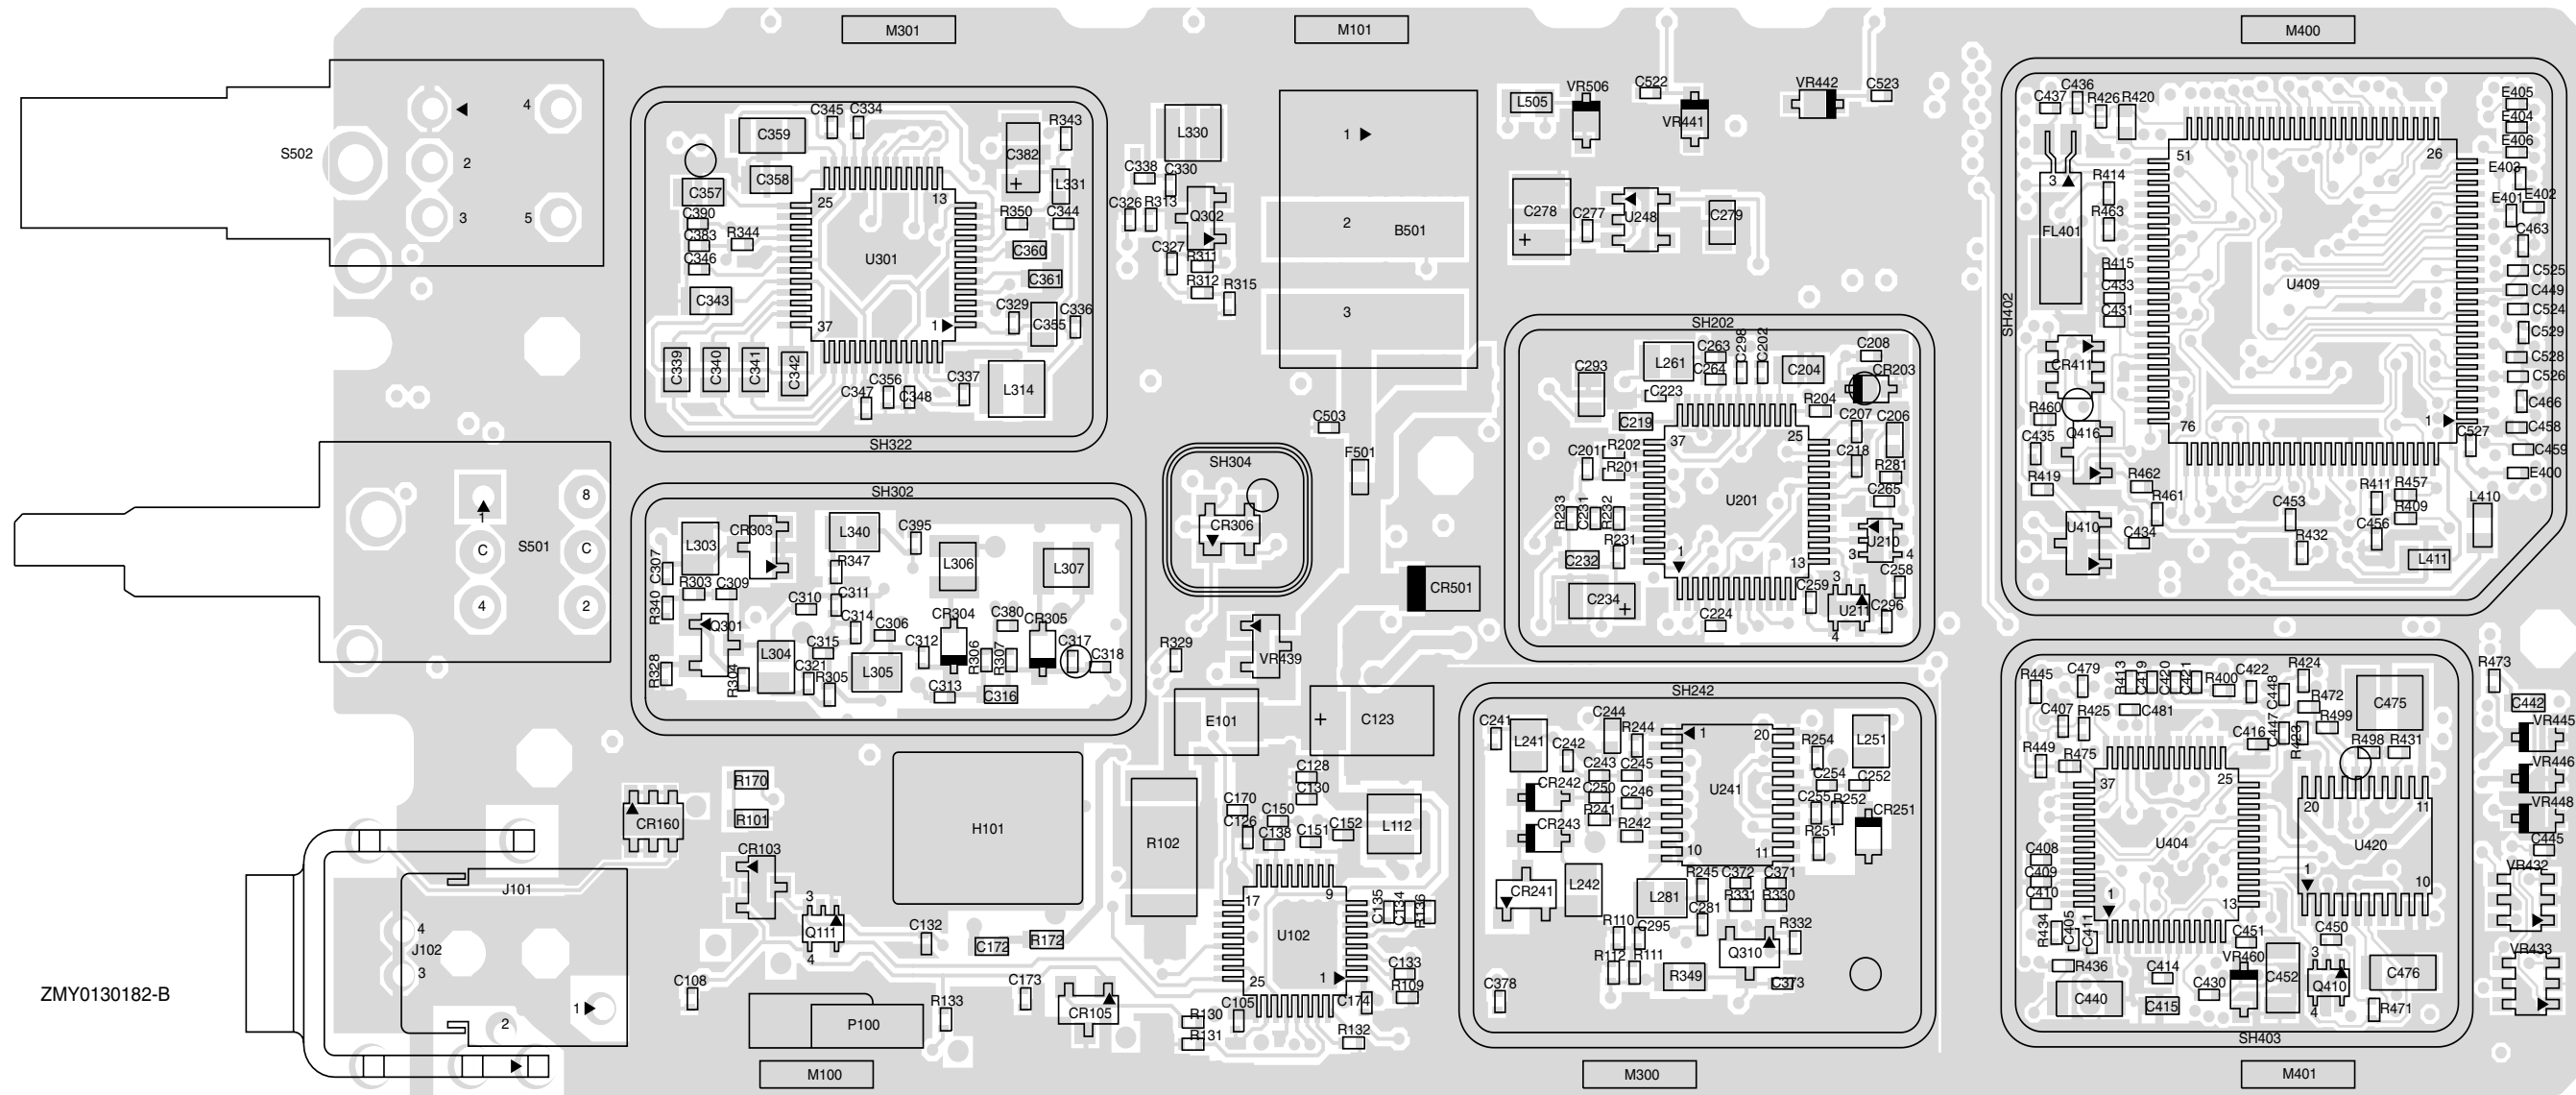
UHF (403-470 MHz) 5000/7000 Series Main Board Bottom Side PCB 8480450Z13
